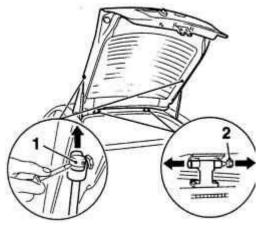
Mounting the back of doors: 1 - Lock clamp a gas-filled counters, 2 - retainer axis of the hinge
